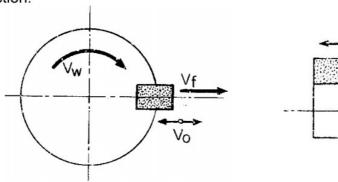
superfinishing of end face of a cylindrical work piece in radial mode
